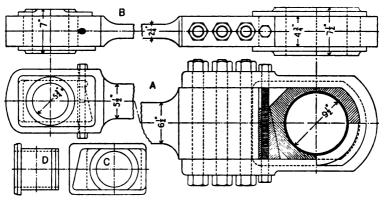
Rod for 22" and 42" by 27" Engine, 175 R. P. M., pistons in Fig. 279 I. Scale 1 to 15.
